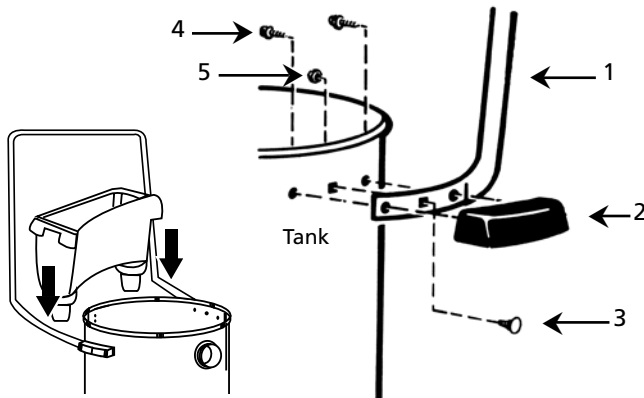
Repair Parts illustration for Handle Assembly for Model 6AKY3
